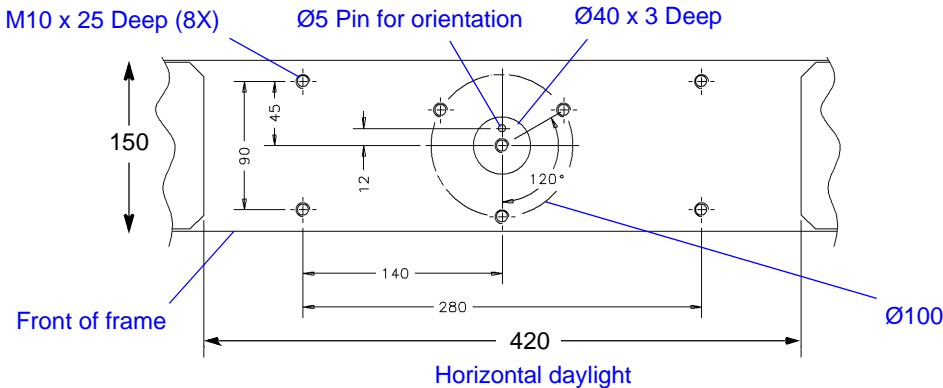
Series 5564, 5565, 5566 Standard Configuration - Base Beam Mounting Dimensions
